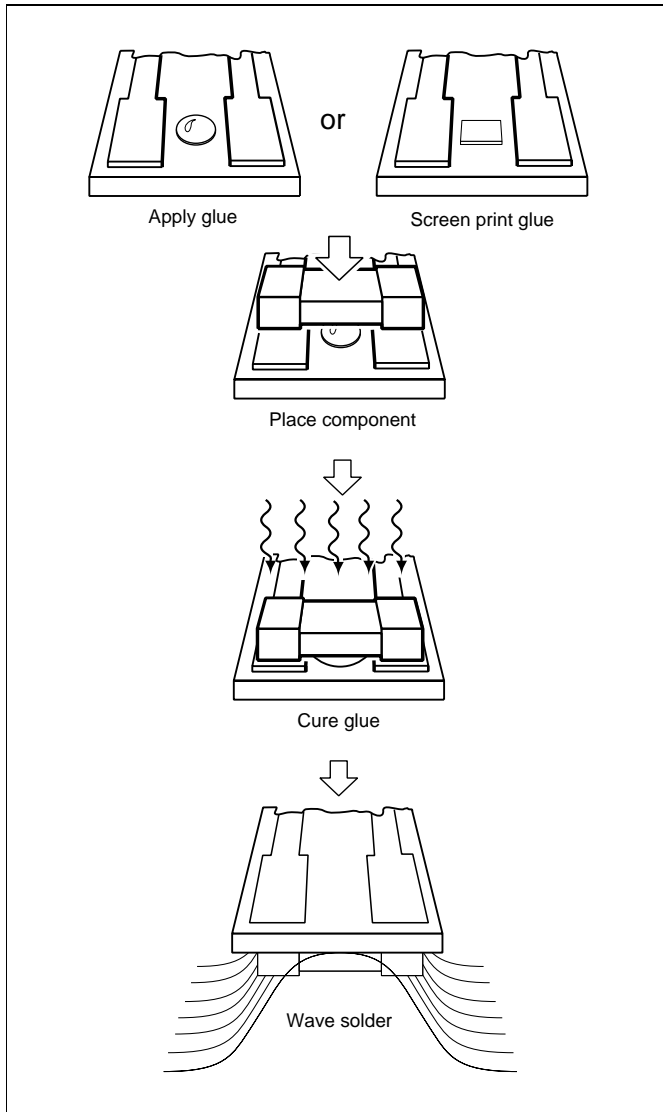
Wave Soldering PCBs With Surface Mount Devices Only
